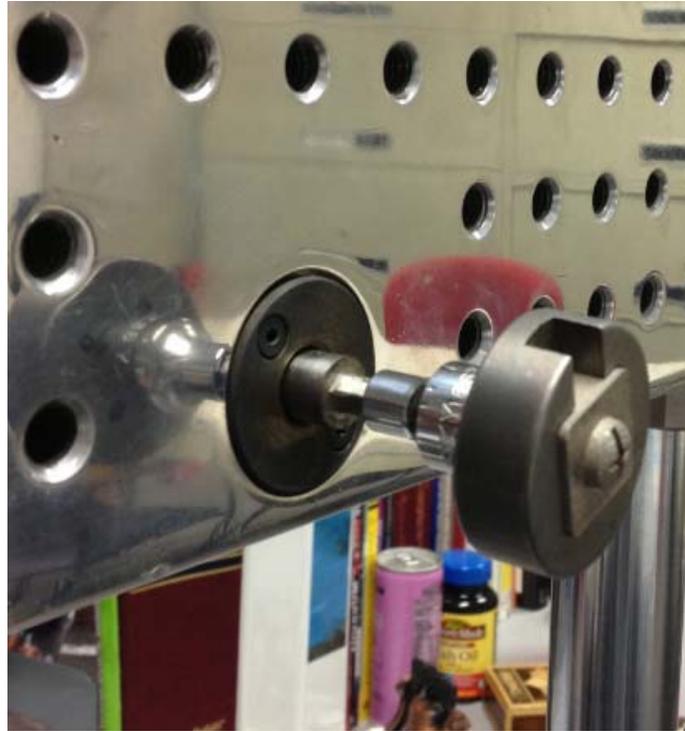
Coupling Assembly Mounted on Test Fixture
